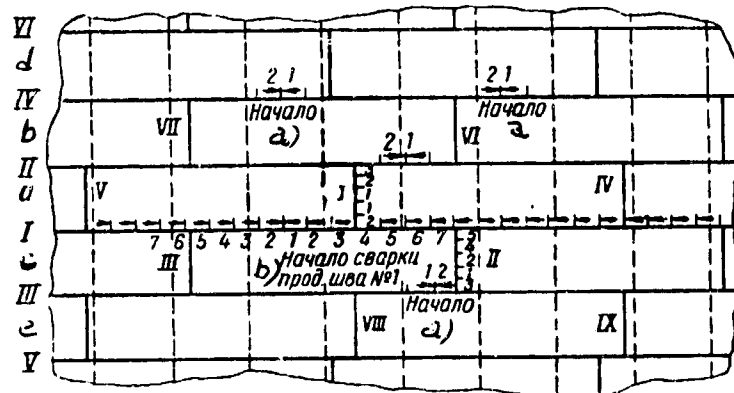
Sequence of Applying Seams in Replacement of Several Sheets of Outer Planking: the letters a, b, c, d and e refer to the order of assembling the strakes; the Roman numerals I - IX indicate the sequence of welding the joints and slots; the Arabic
